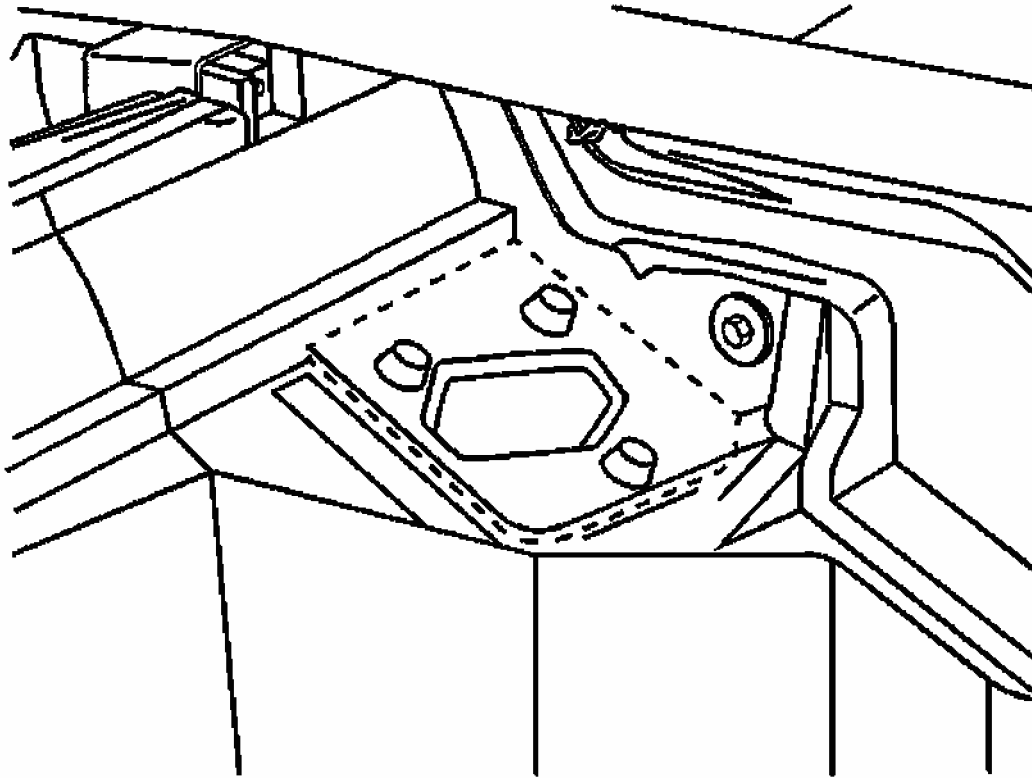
Identifying Heater Core Access Cover & Screws
